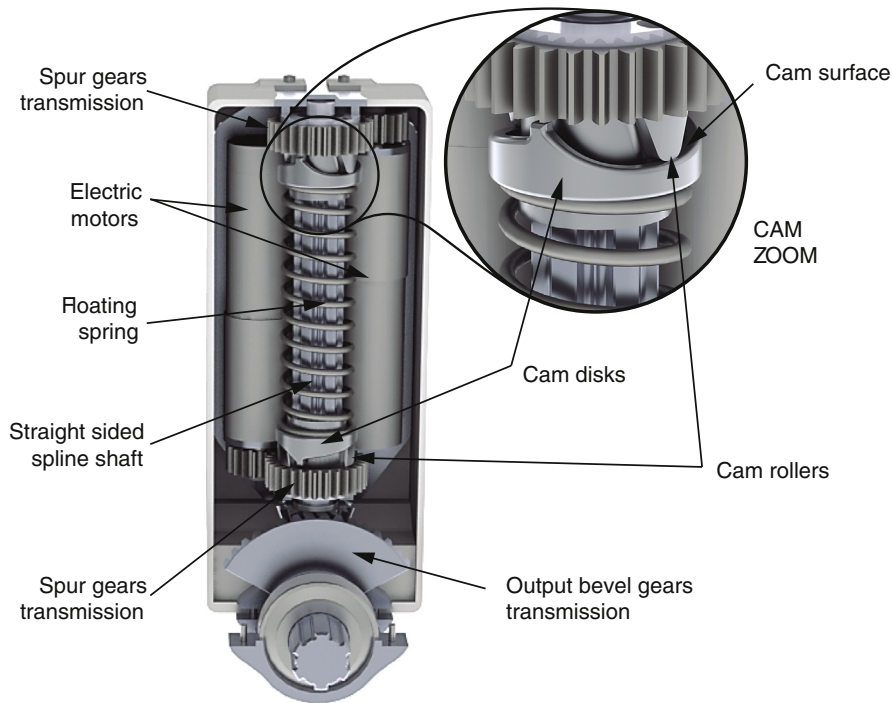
Design of the BAFSA showing its main parts and a zoom of the cam shape to be designed.
